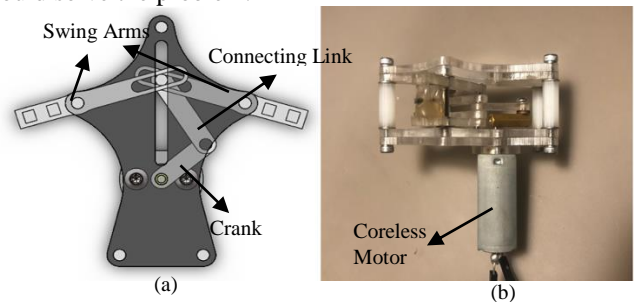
Slider-crank mechanism: (a) top view of the 3D model and (b) side view of the prototype.
